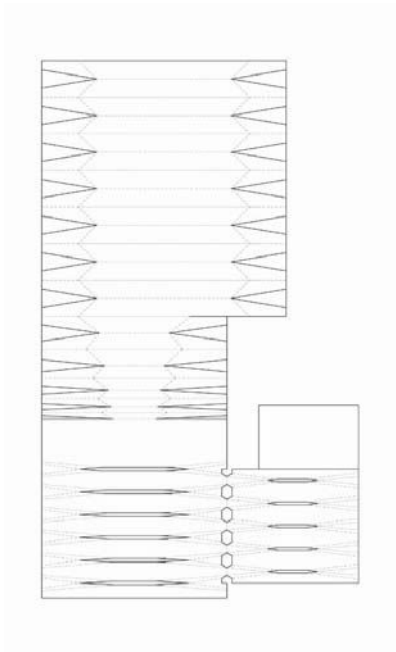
Plan layout of the plaster pour prior to being folded to make the mold.
